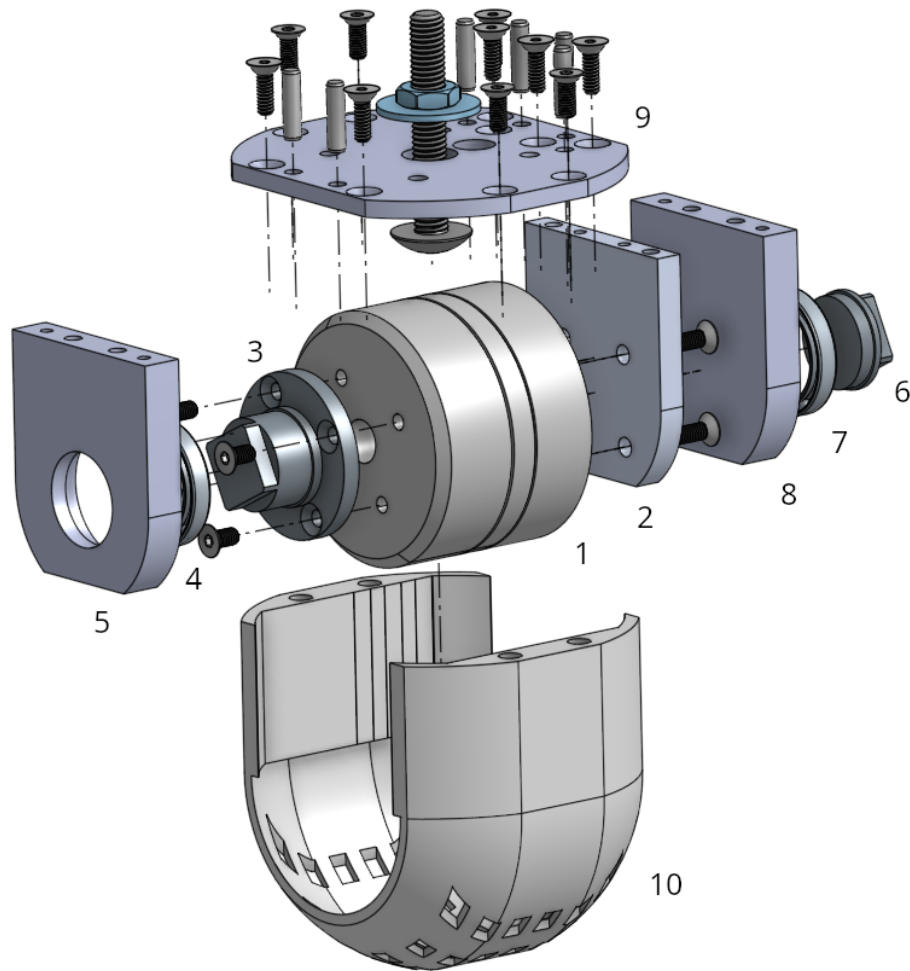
Exploded view of the elbow design. The motor (1) is seated in the center of the elbow joint, mounted to the motor mounting plate (2) via countersink screws. The motor output is connected to the bracket (not shown) by the motor flange shaft (3) that is seated in a bearing (4) within the elbow joint side housing (5). This design is mirrored behind the motor (6-8), however, the flange shaft (6) is not connected to the motor. The side housings and motor mounting plate (5, 8, 2) are fixtured to the top plate (9) via screws and located using dowel pins. Finally, the motor housing (10) protects the user from the moving internal components.
